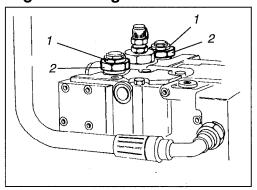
Drive pump 1 Towing valve 2 Lock nut
